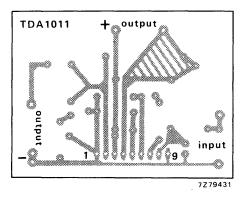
Track side of printed-circuit board used for the circuit of Fig. 4; p.c. board dimensions 62 mm  $\times$  48 mm.
